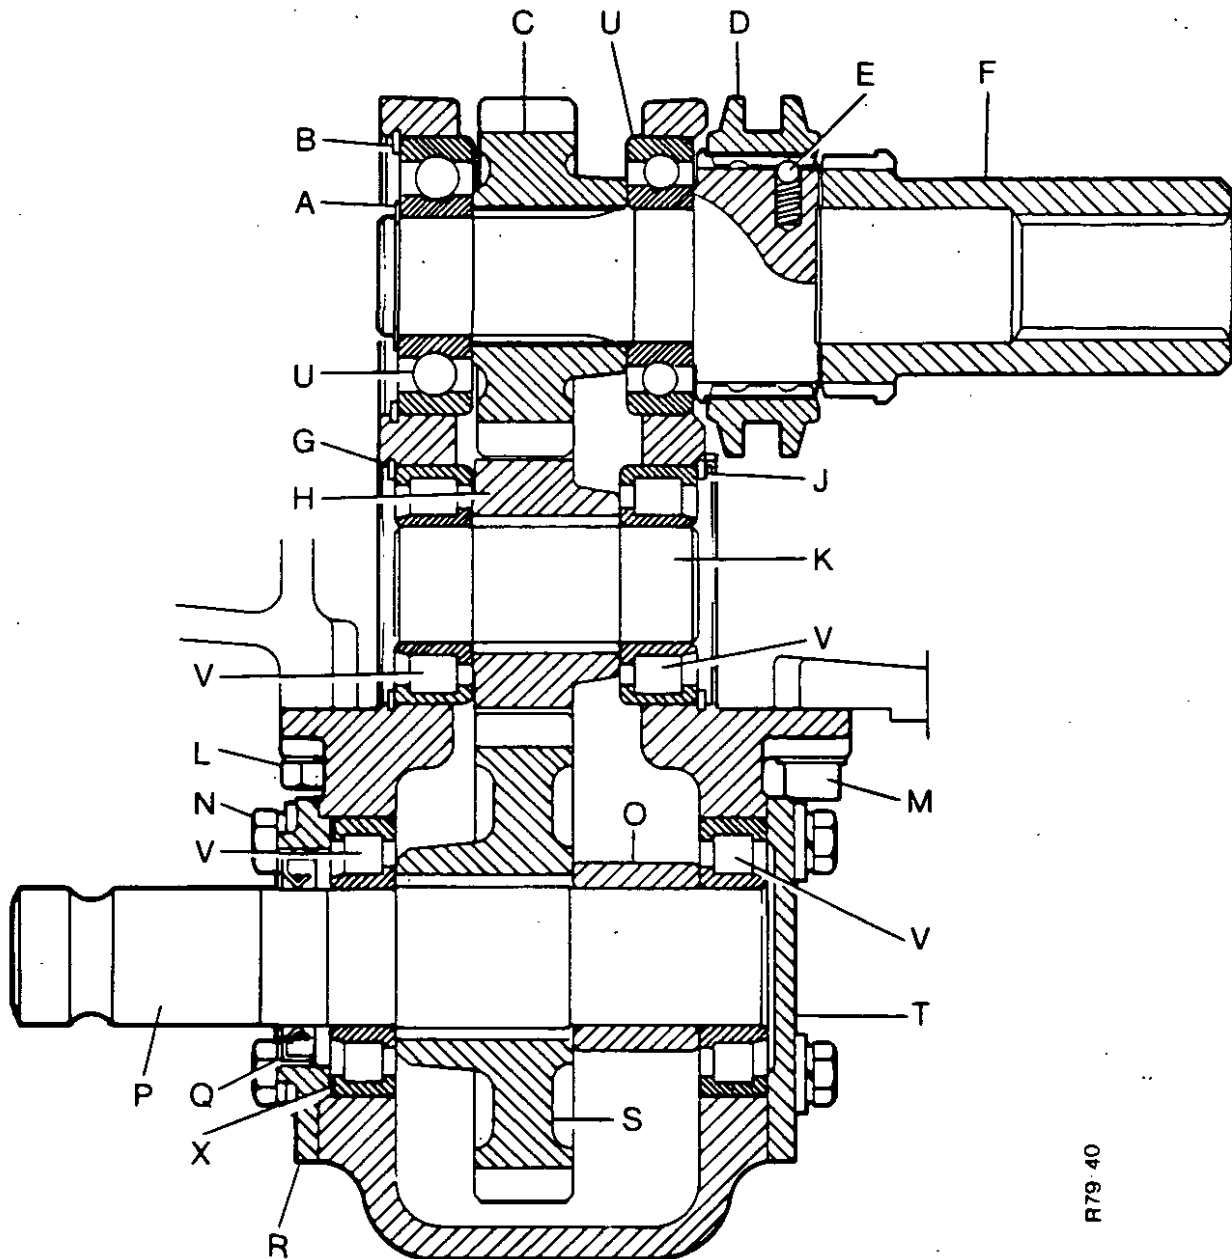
TRANSFER GEARBOX ASSEMBLED
